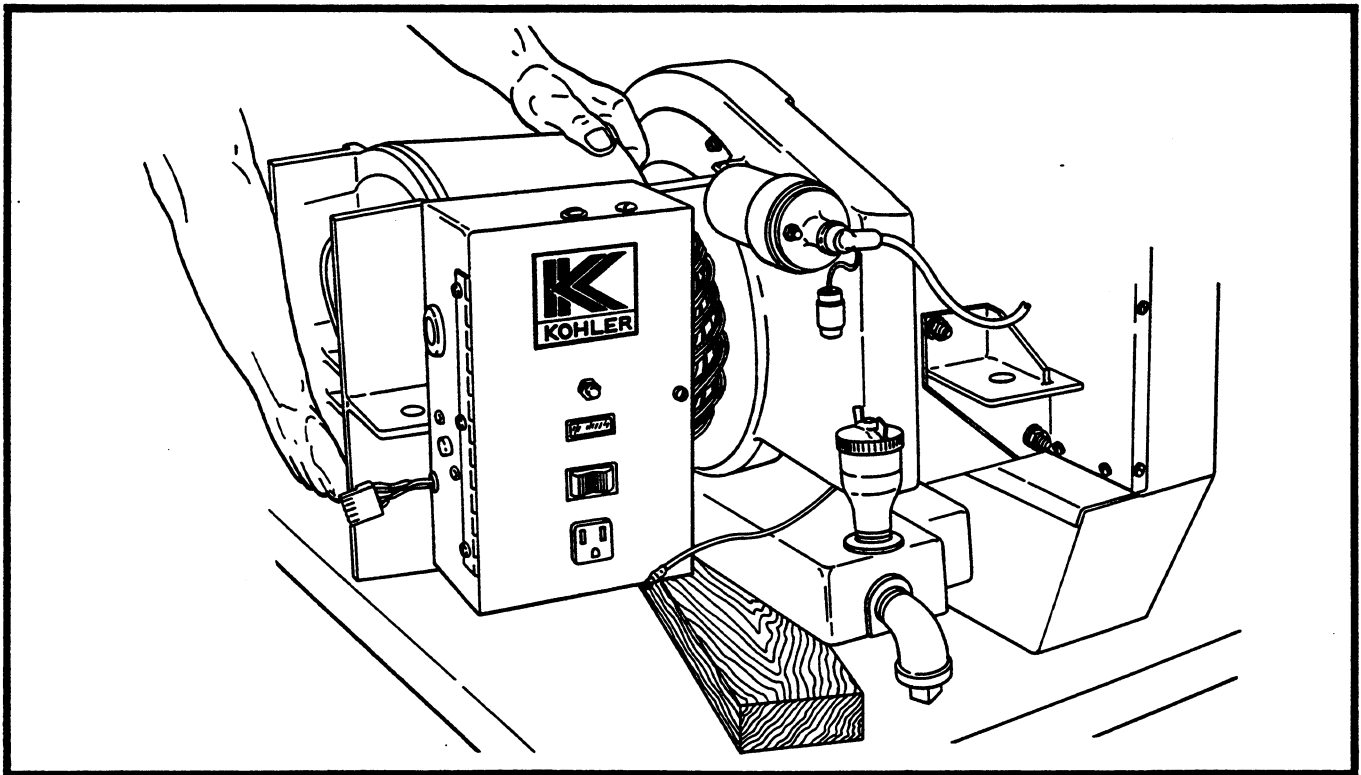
REMOVE END BRACKET, GENERATOR FRAME AND CONTROLLER AS A UNIT
